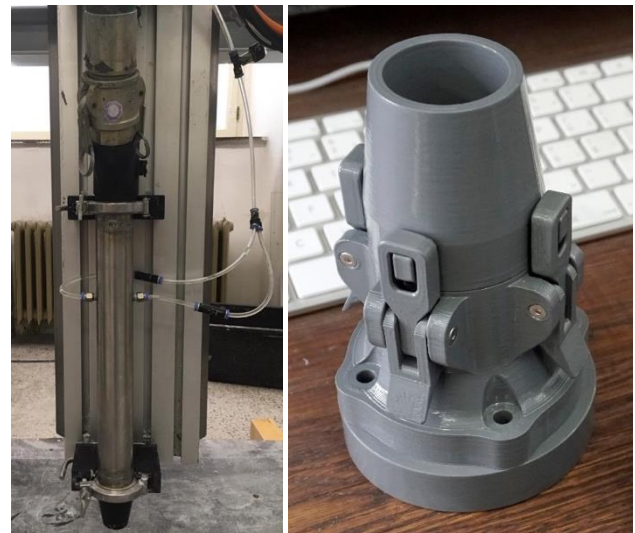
The printhead with setting accelerator injection and nozzle with quick-release system
